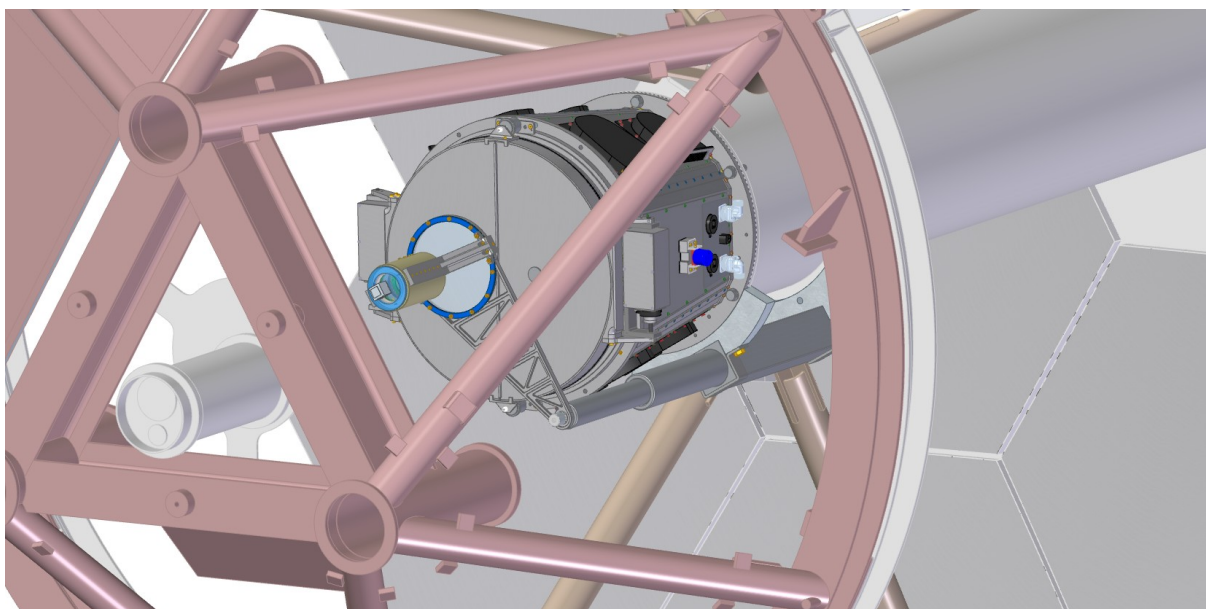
Close-up view of the SI3 positioning arm holding the focal plane optics, deployed above the Cherenkov camera.
